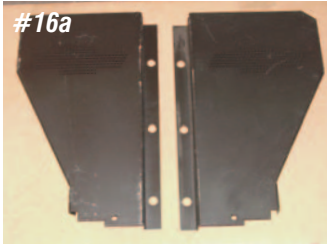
& 16b & 16c: The tubular core support uses custom filler panels that bolt to the backside of the core support and to the original holes in the inner fenders and splash pan. The panels are available with louvers or bowties, primed carbon steel or polished stainless steel.
